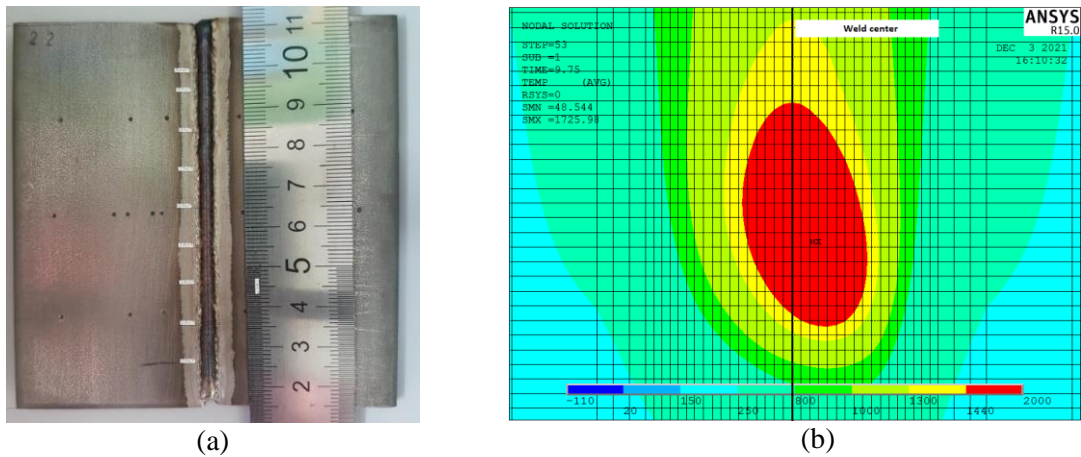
The width of the weld after a two-pass GMA-welding with transverse vibrations (a) and an example of the penetration zone when modeling the second weld of a GMA-welding with transverse vibrations (b)
